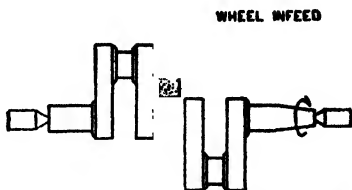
Grinding a crankshaft. (The Socony-Vacuum Oil Company)
